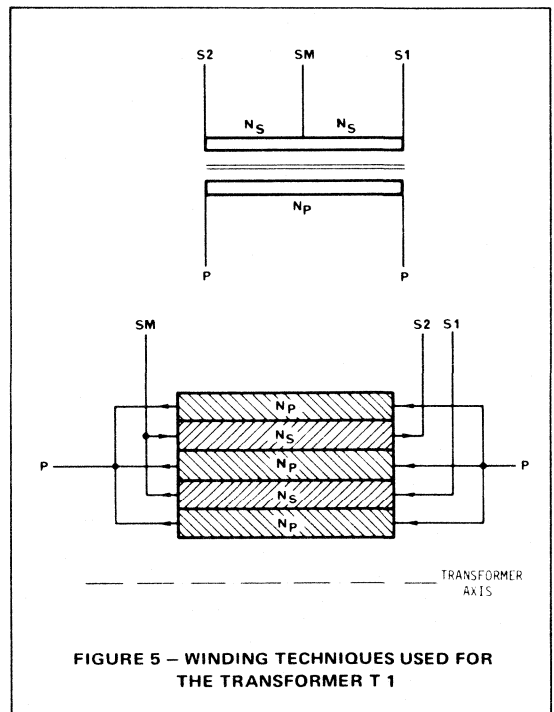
WINDING TECHNIQUES USED FOR THE TRANSFORMER T 1
